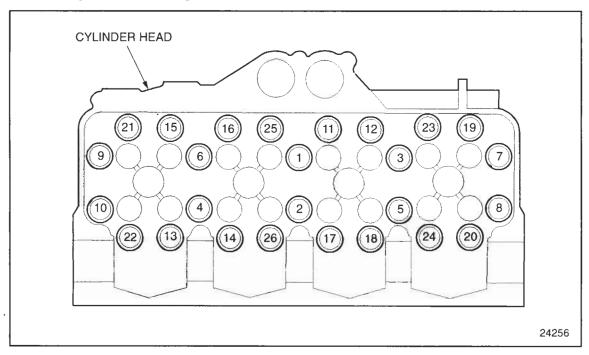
Cylinder Head Bolt Tightening Sequence
